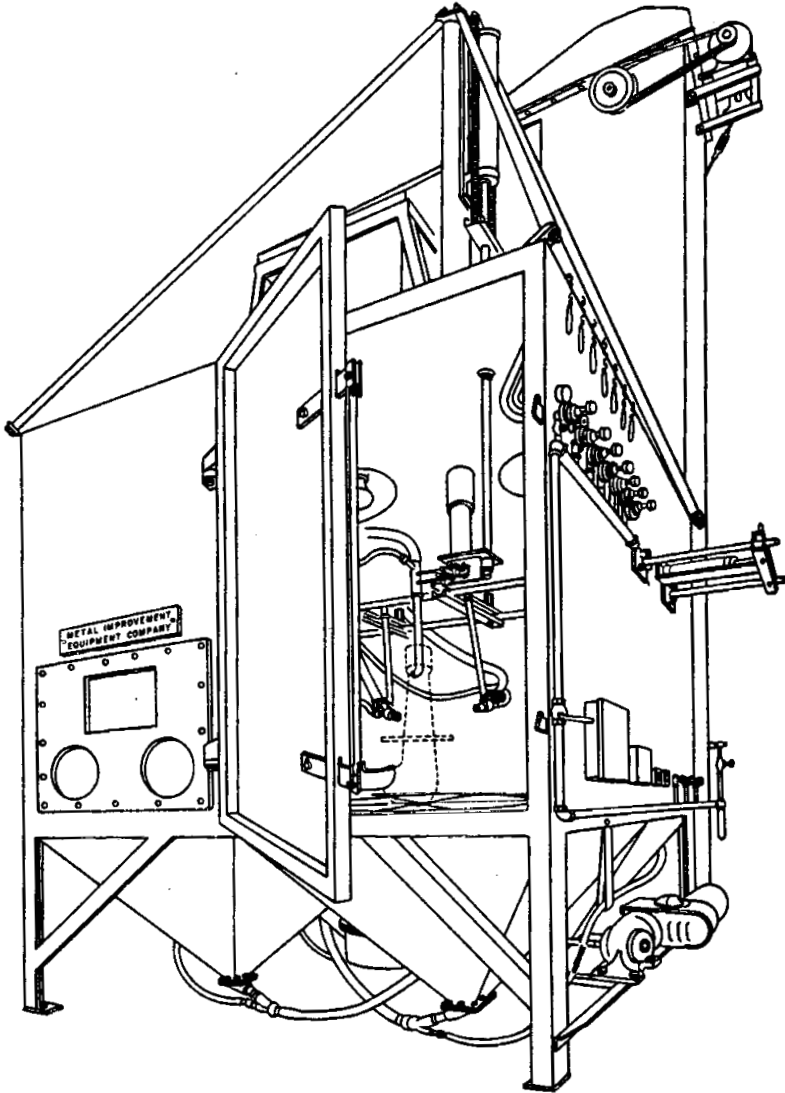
Air-blast peening machine. (Courtesy of Metal Improvement Equipment Company.)
